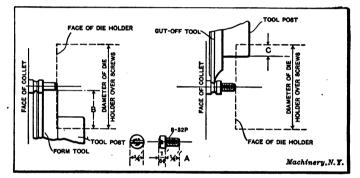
Diagram illustrating Method of Finding Clearance for Die Holder
